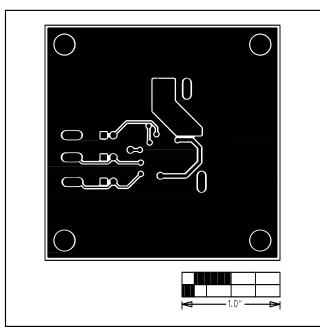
MAX8614 EV Kit PC Board Layout—Solder Side
